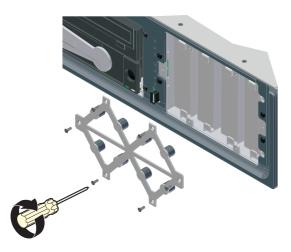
Reinstalling the Show Store Retaining Bracket
